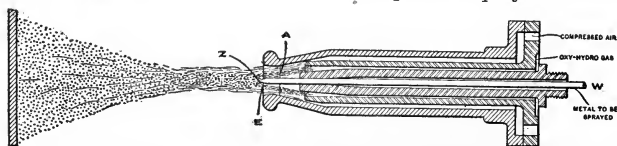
FIG. D—DETAIL OF METAL SPRAY PISTOL NOZZLE
